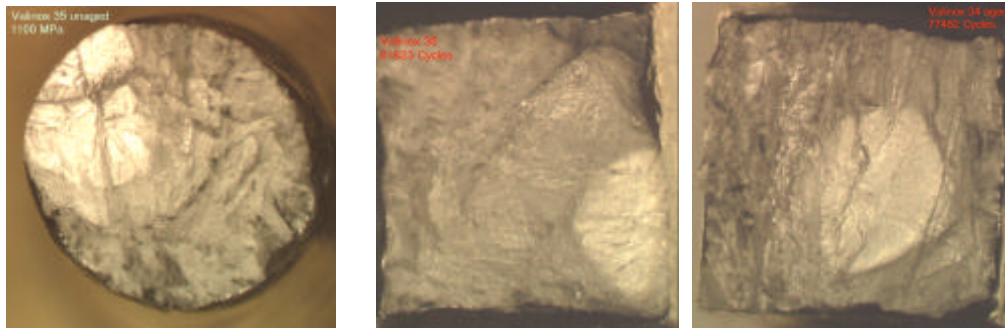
Tested flat and circular Valinox weld metal specimens.
